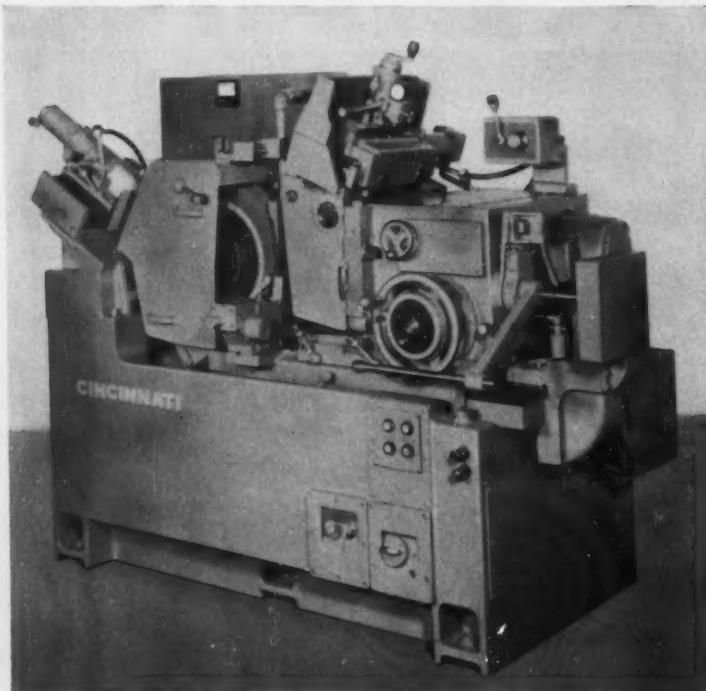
(Left) Cincinnati 210-6 centerless grinding machine designed for job-shop work
